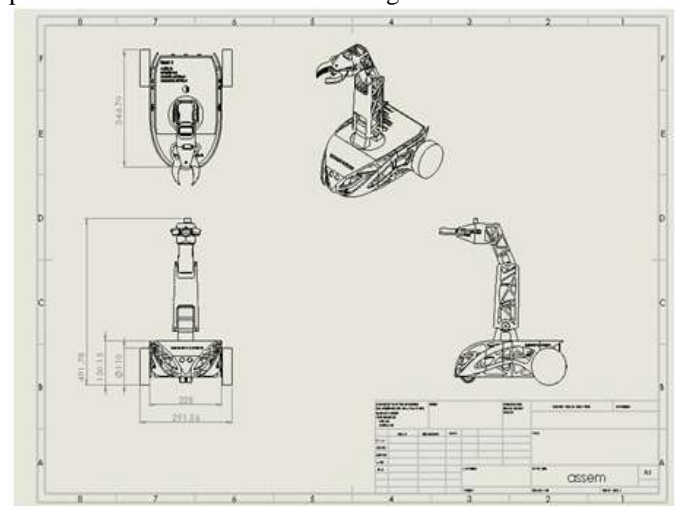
Dimensional Drawings of Front view, Left view and Top View
